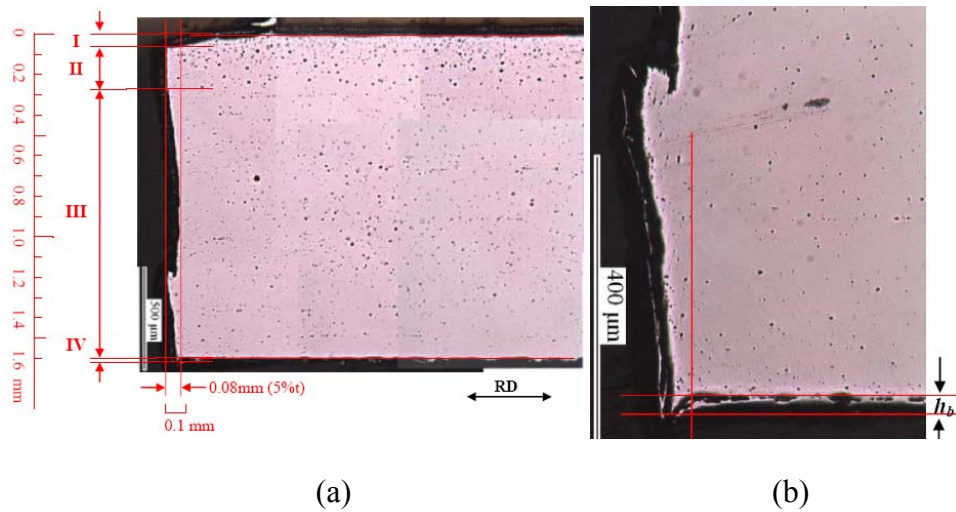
A sectioned DP780 sample that shows geometrical features of mechanically pierced edge, consisting of four edge zones: I-Roll-over, II- Burnish; III-Fracture; IV-burr, see (a). The local enlargement of the burr geometry is shown in (b).
